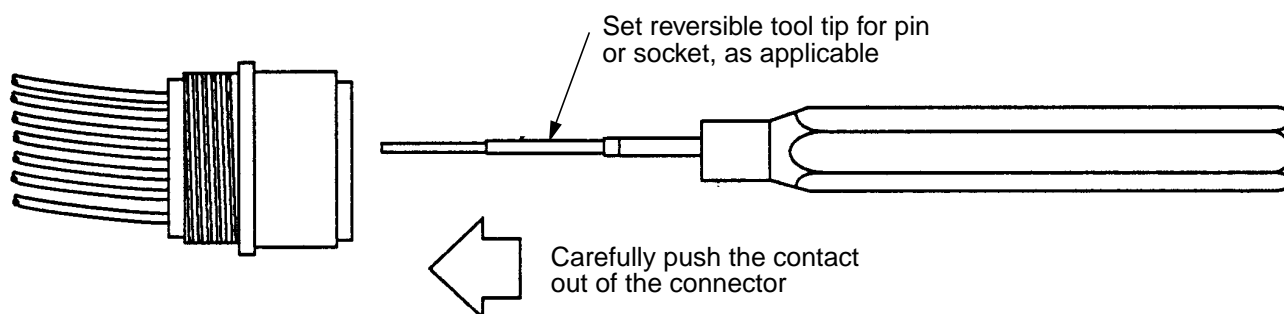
Removal of Front Release Contacts using a CET Extraction Tool
